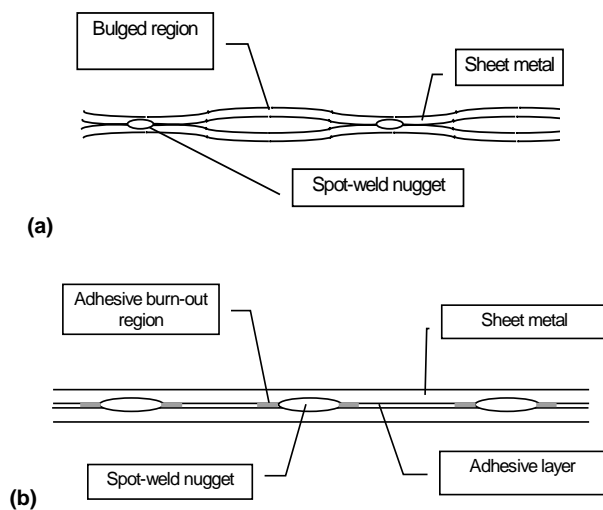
Advantages of combining adhesive bonding and spot welding: (a) without adhesive bonding, the sheet metal may warp and bulge between spot welds due to service loads; (b) with adhesive, warping is
